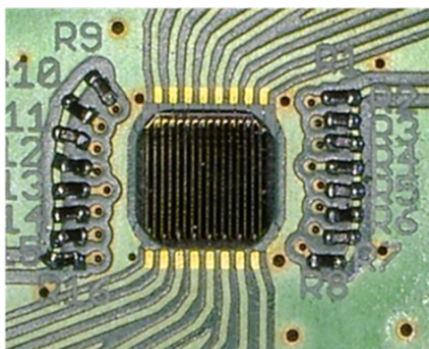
The diamond sensor is mounted on a PCB plates and the read-out electrodes are bonded to the PCB traces using aluminum wires.
